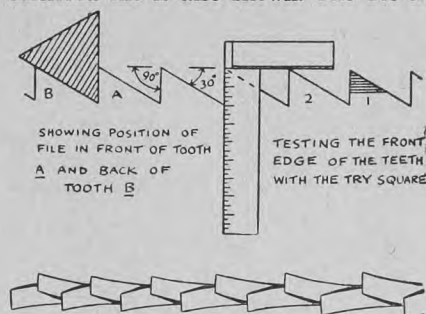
Rip saw teeth, showing angles and cutting edges.
